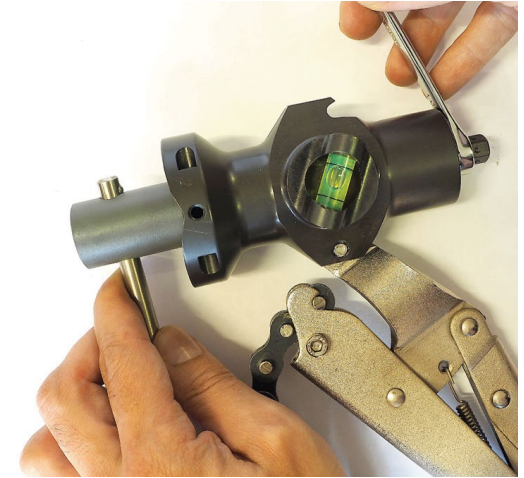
Use the cutter removal tool and wrench provided to remove or secure the cutters. Note the cutter removal tool's 15mm side (shallow) and 16mm side (deep).
